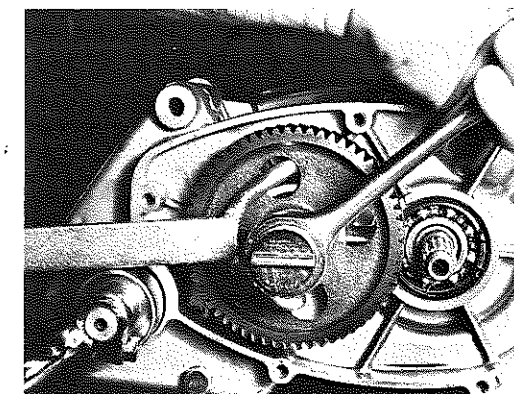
Removing nut securing primary gear to transmission main shaft.
